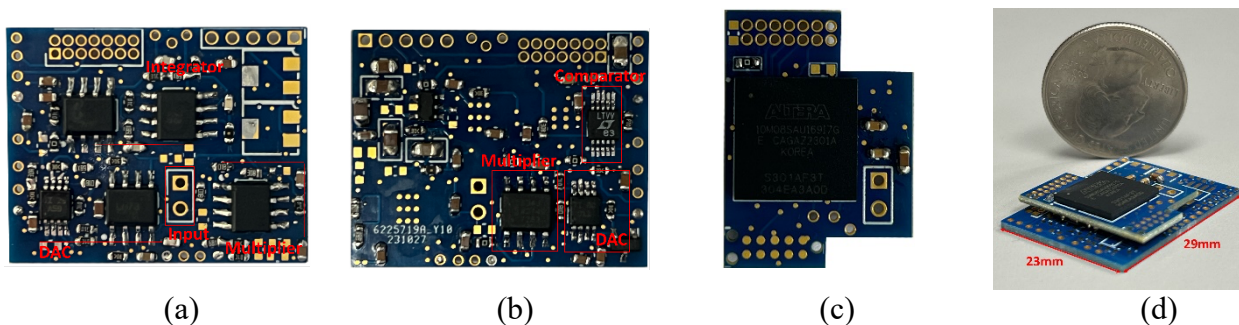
Designed current sensor (a) Top view of integrator board (b) Bottom view of integrator board (c) FPGA board (d) Assembled current sensor
